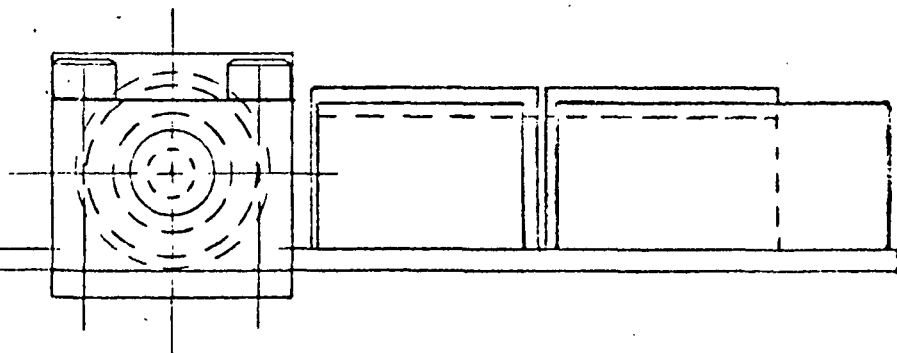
A. ASSEMBLY DRAWING OF MOISTURE SENSING DEVICE
